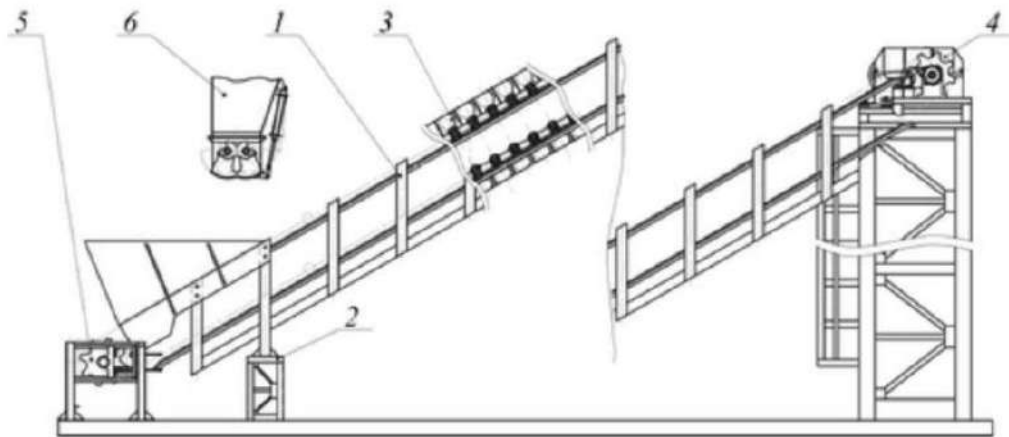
Plate conveyor: 1 - inclined section; 2 - additional support; 3 - deck; 4 - drive station; 5 - tension station; 6 - hopper.
